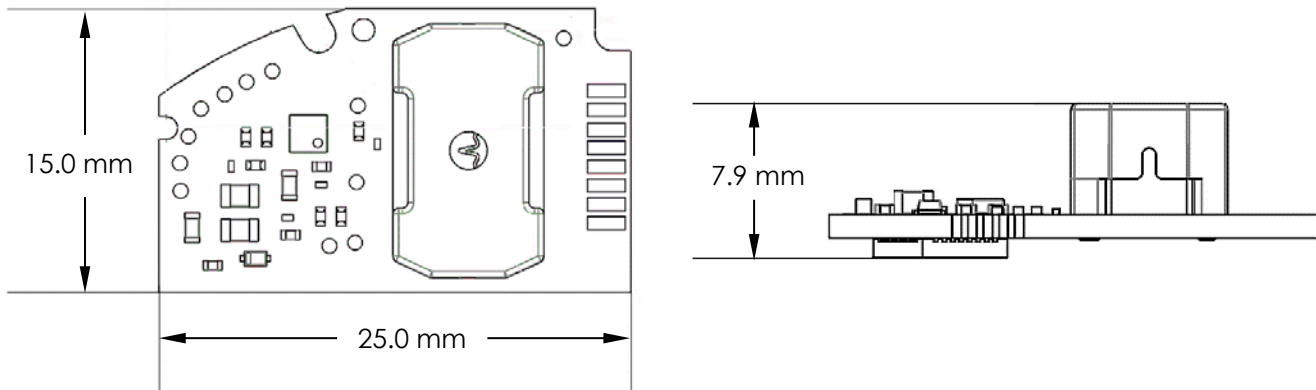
QP39-B154-S00 Surface-Mount (SMT) Blind Hollow Shaft PCBA Dimensions
